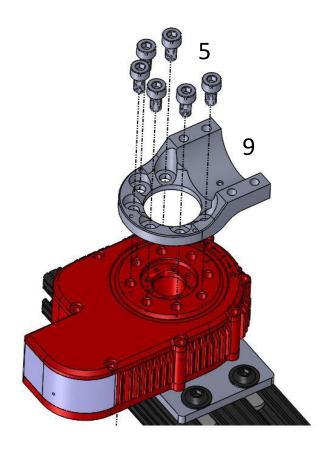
Attaching the Bottom Half of an Output Tube Adapter
